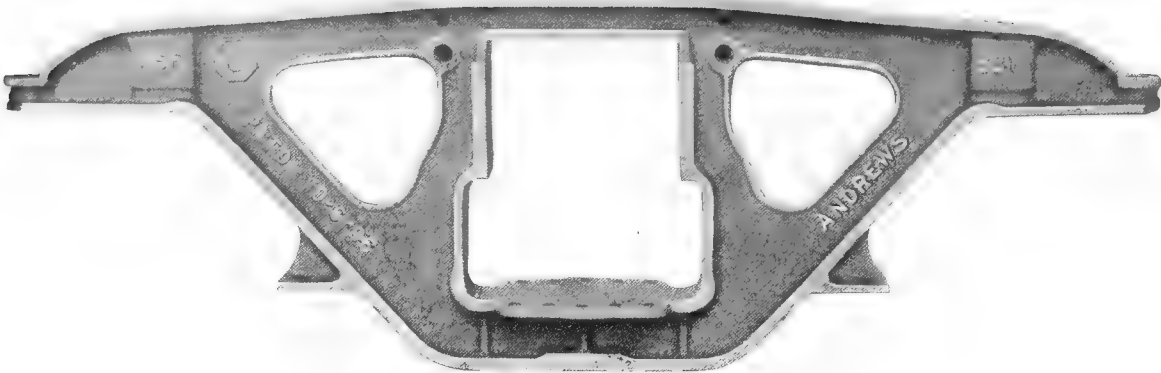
Andrews Cast Steel Freight Car Truck Side Frame for Use with Short Tie Bars. American Steel Foundries.
